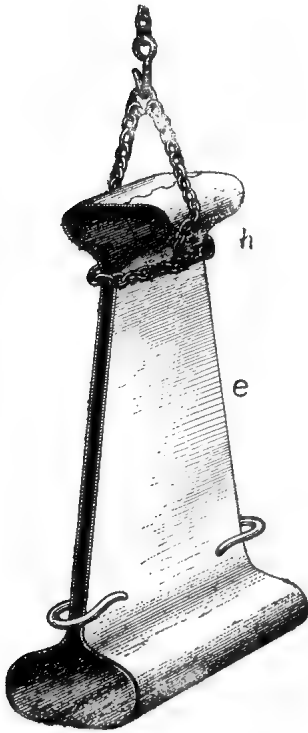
Section of Air Pipe Ready for Brazing Seam.
